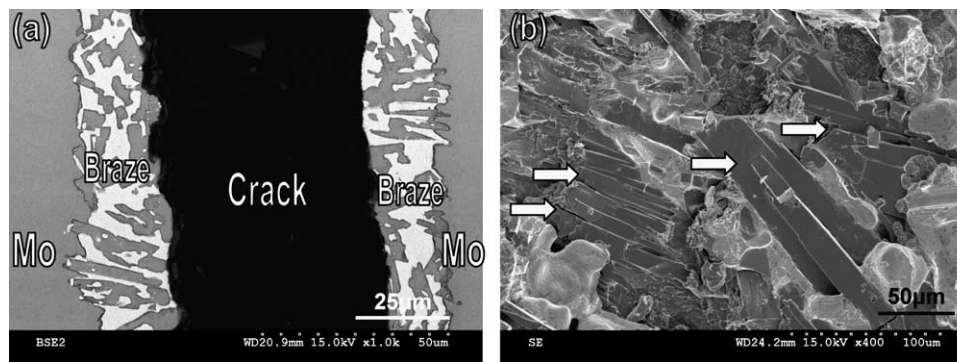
The SEM: (a) BEI cross-sectional image and (b) SEI fractograph of the furnace brazed Mo/70Au–22Ni–8Pd/Mo joint at 1050 °C for 1200 s after the shear test.
